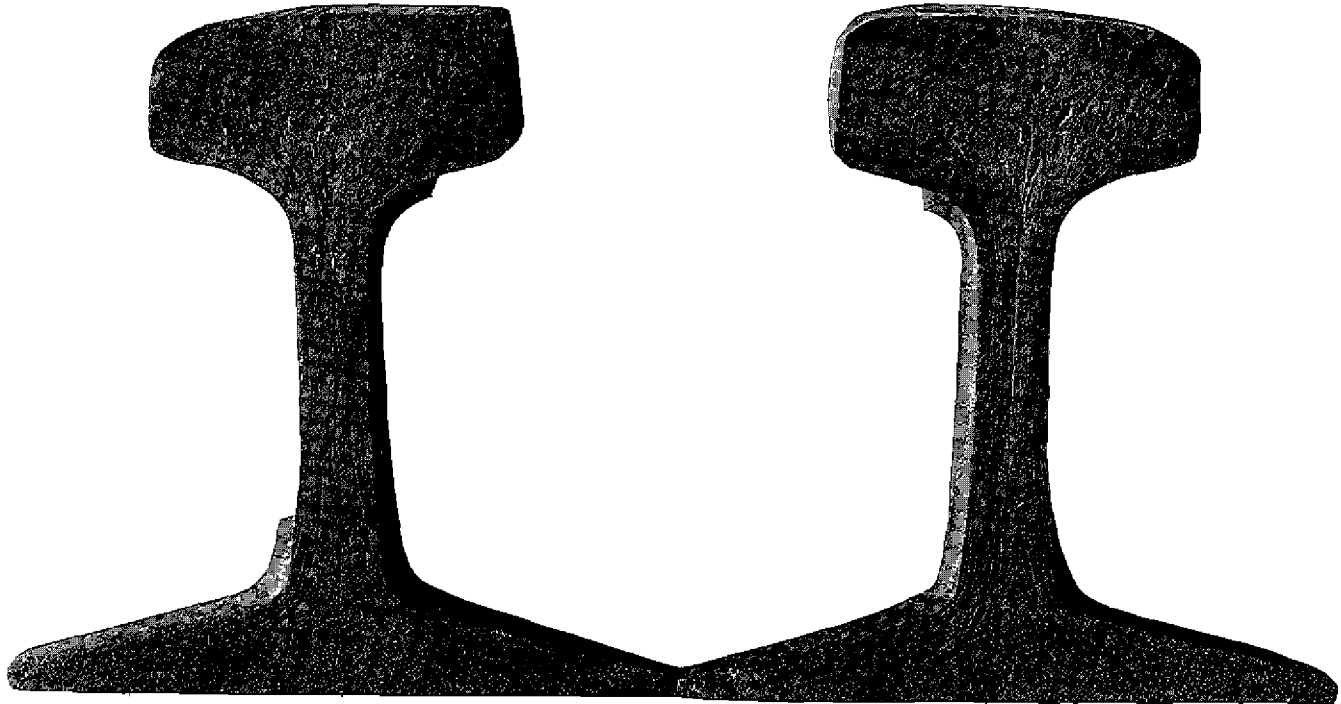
80 pound rail which failed near Savan, Pa. Cross sections near place of fracture, showing appearance after pickling in hot acid
